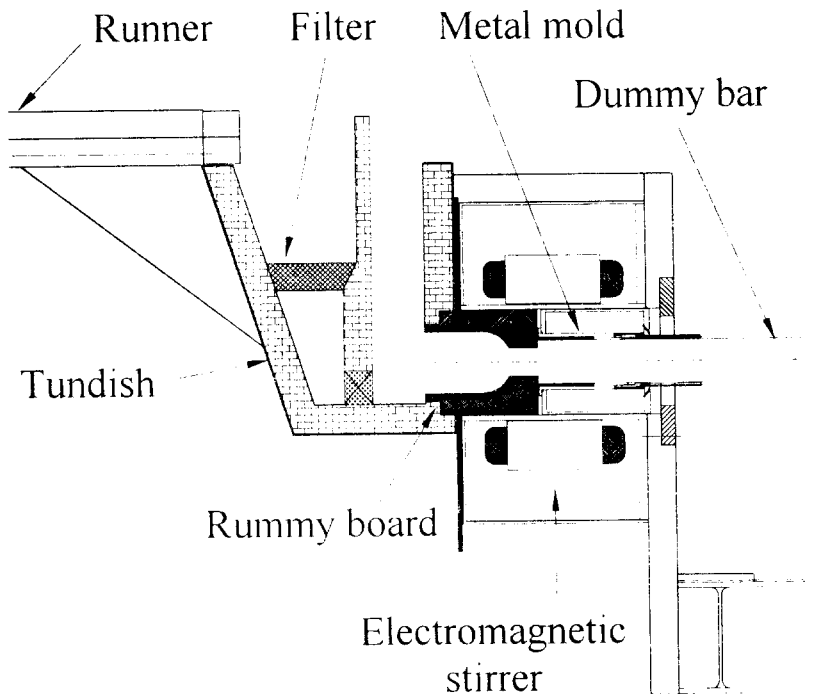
Schematic of horizontally continuous casting machine with an EM stirrer and a metal mold for s semi-solid billet.
